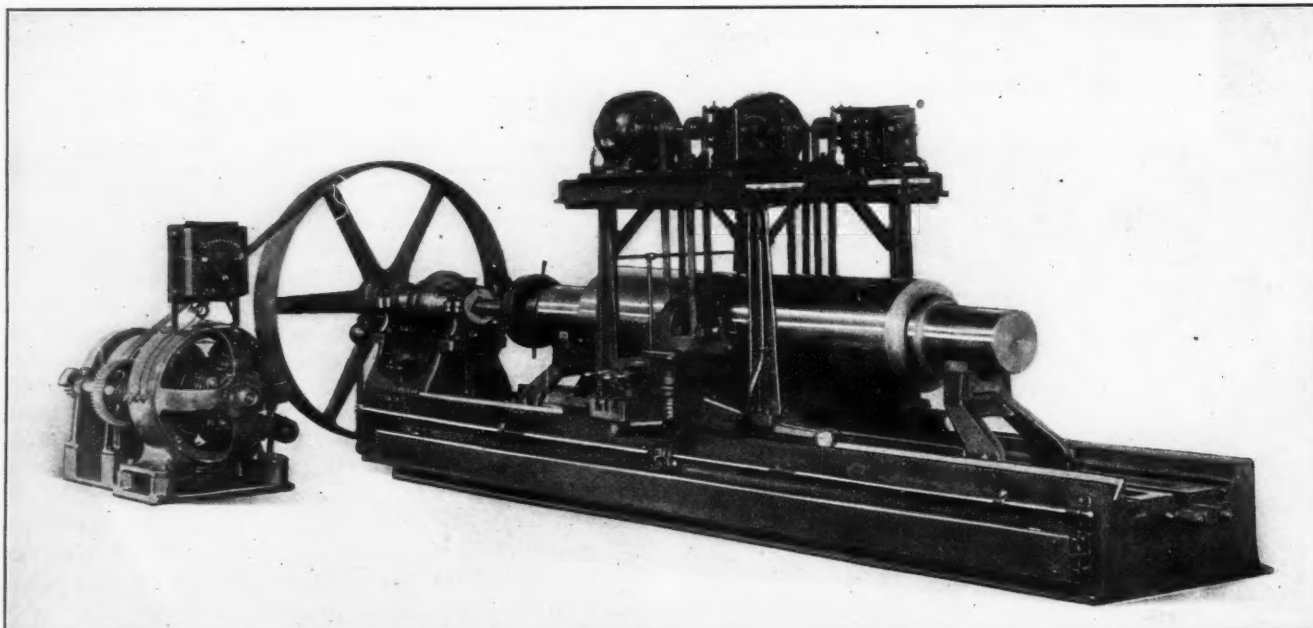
Lobdell electrically driven Roll Grinding Machine
